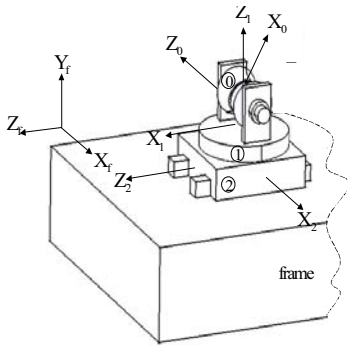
Coordinate systems of workpiece on a 5-axes CNC machining center
